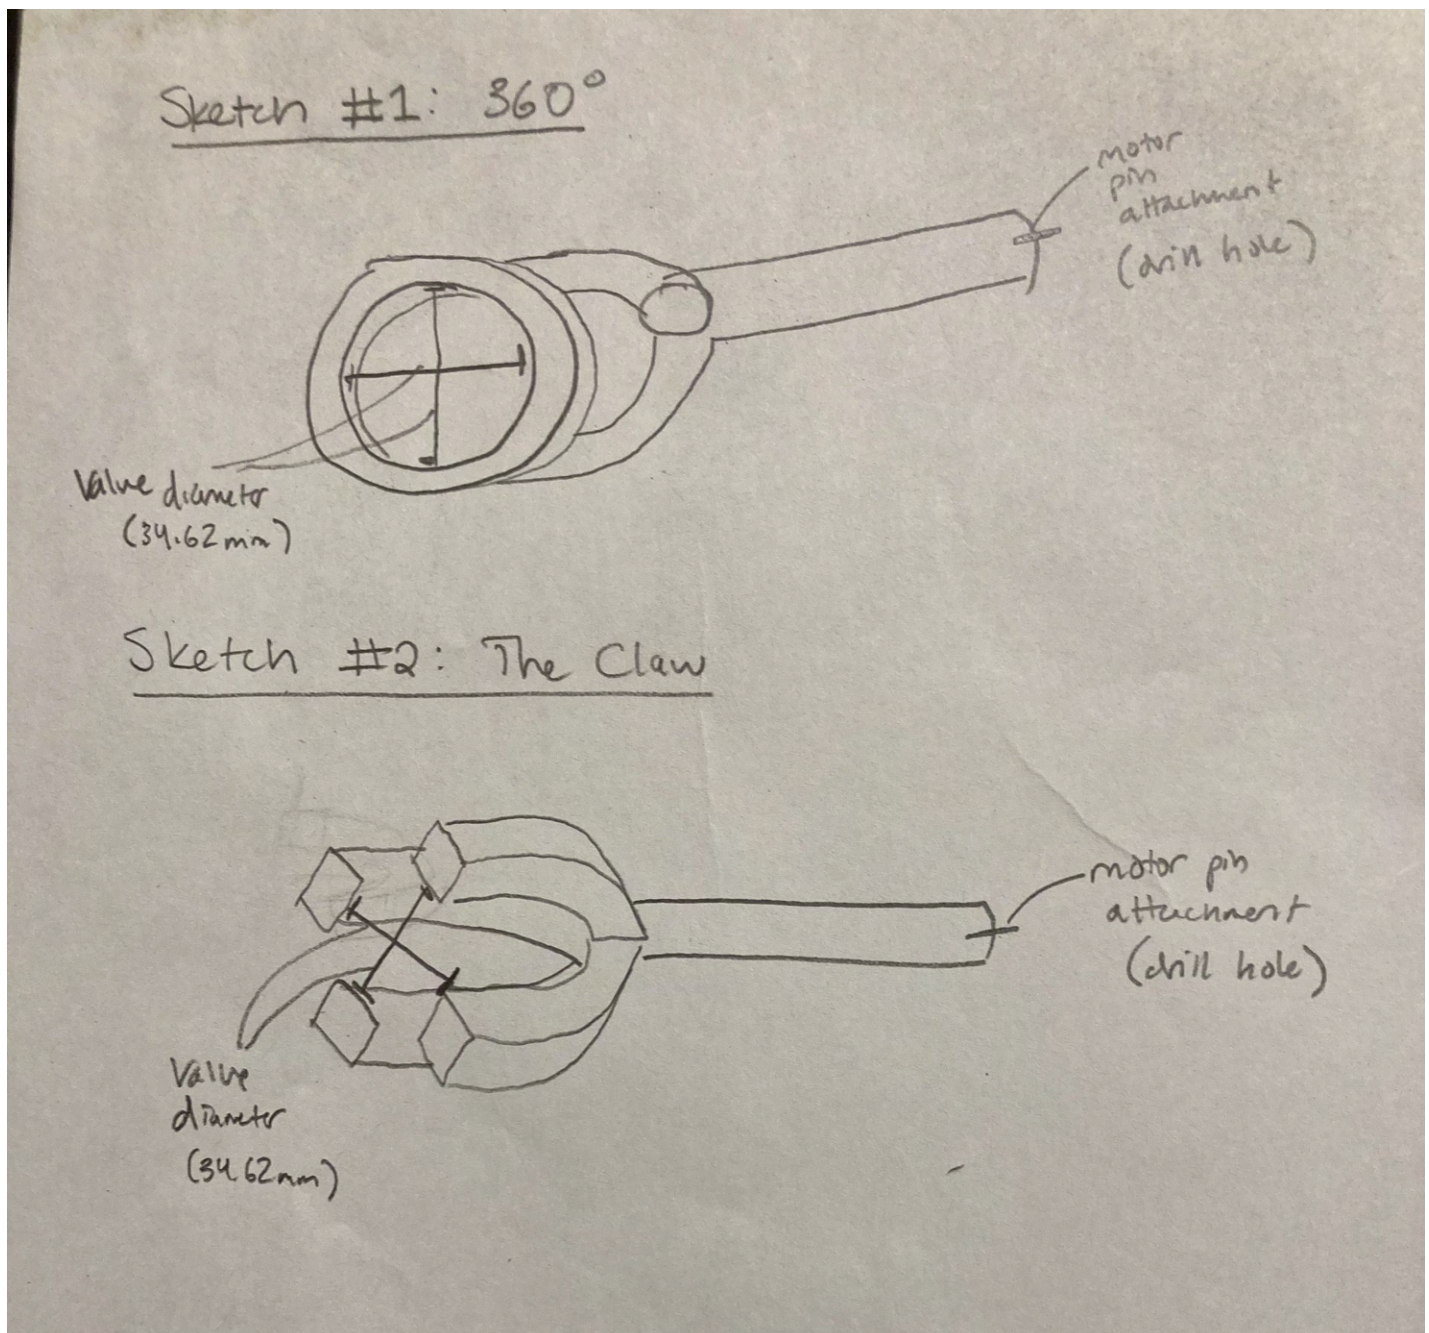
Design Sketches for CO2 Valve Adaptor
